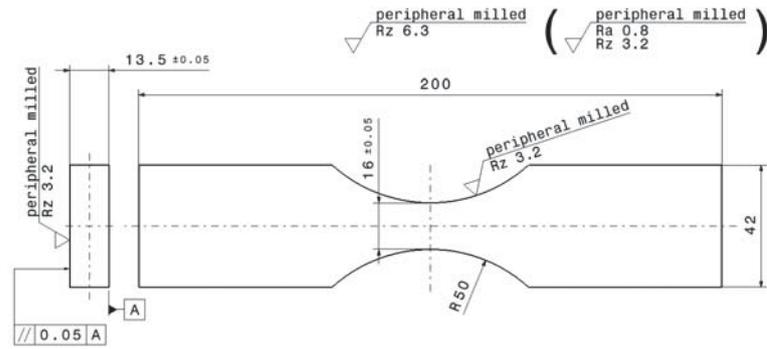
Plane four-point-bending test specimen with machined gauge
